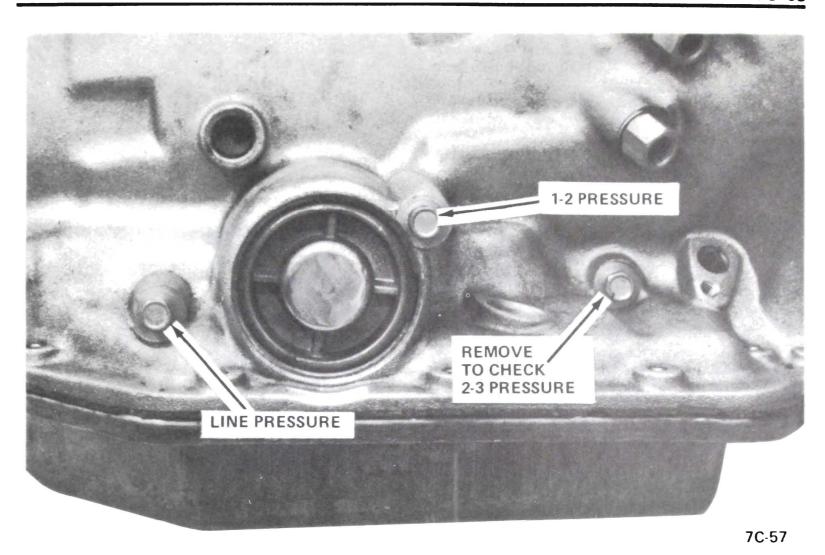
C-57 - Locating of Taps For Hydraulic Pressure Checks
